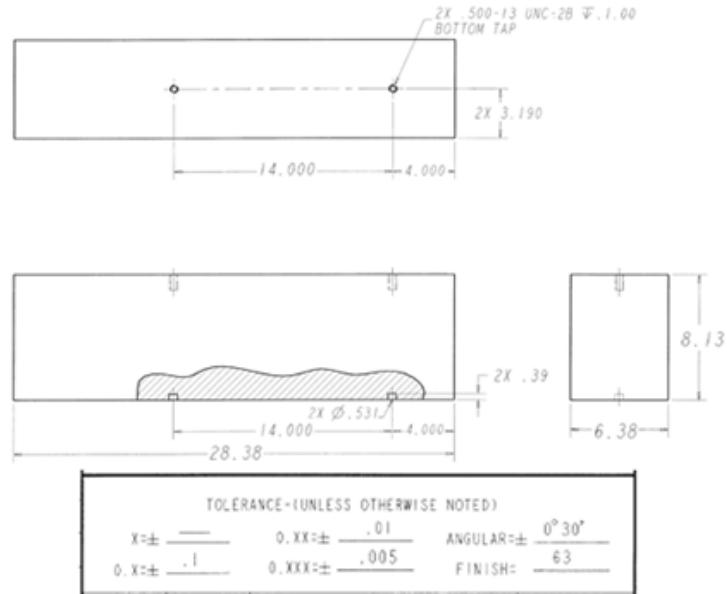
Engineering Drawing (128Y-270955-D2) of a Side Reflector (Dimensions in Inches).
